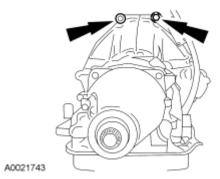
Top Transmission Bolts Courtesy of FORD MOTOR CO.
